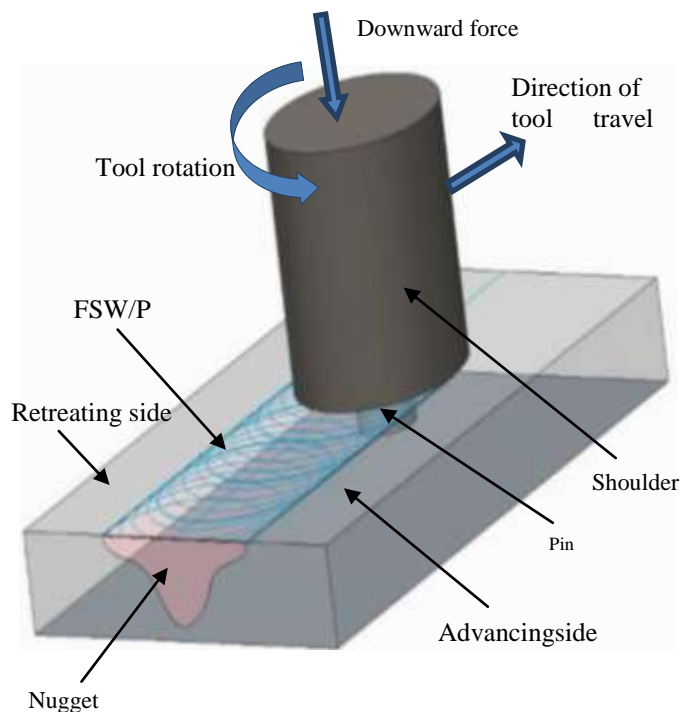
A schematic drawing of friction stir welding/processing
